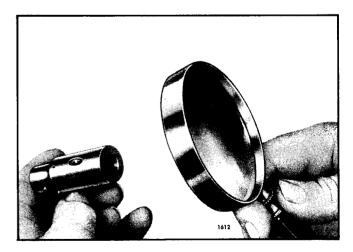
Examining Sealing Surface with a Magnifying Glass
